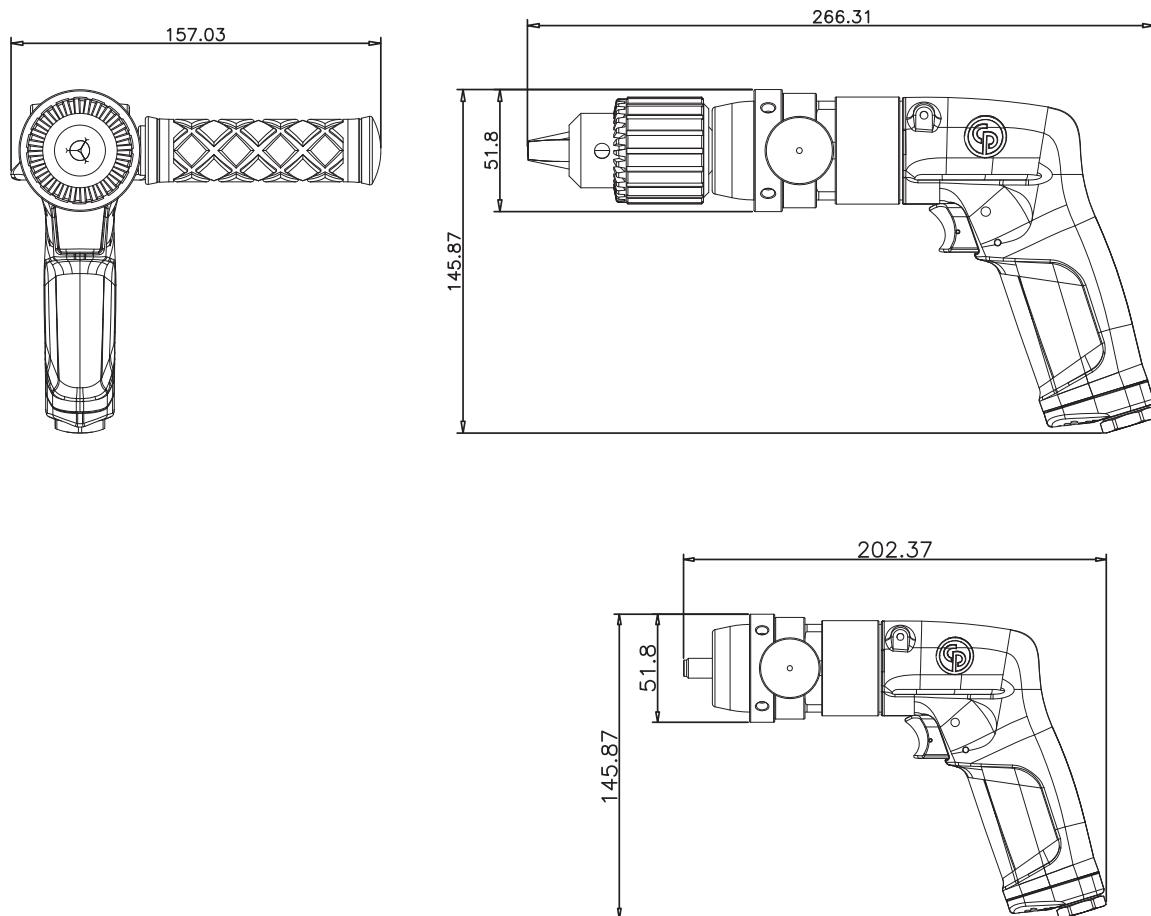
CP1117P05 : DIMENSIONS WITHOUT COVER & WITHOUT CHUCK
